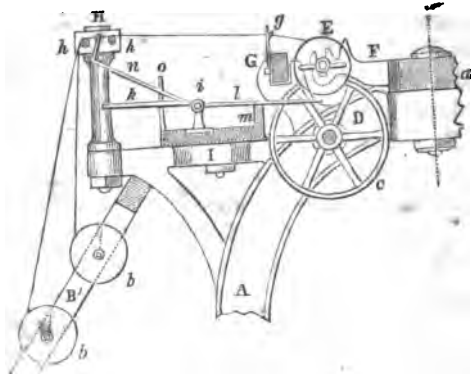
Mechanism of Silk Doubling Mill.—Section.
